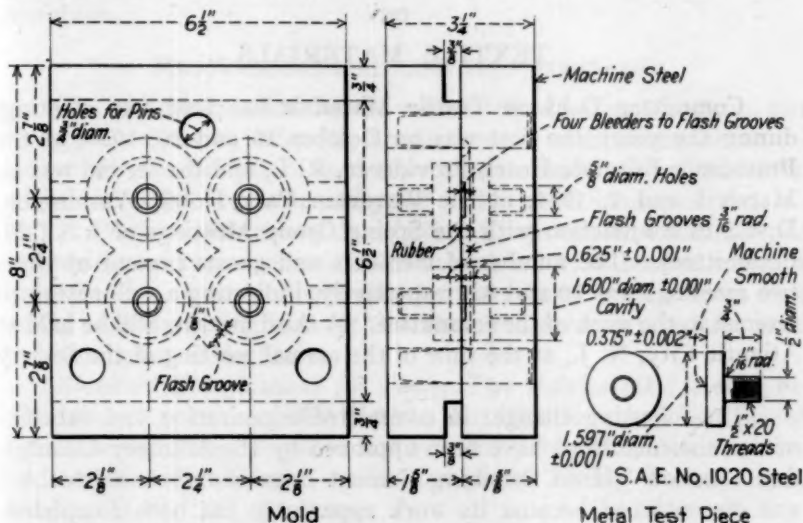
Detailed Drawing of Mold and Adhesion Test Piece.
